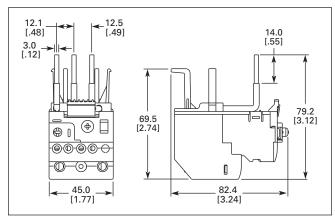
45 mm C396 (6.4 – 32A) Direct Connect to XT Frame C Contactor — Approximate Dimensions in mm [in]
